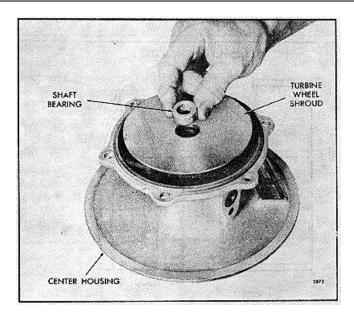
Installing Shaft Bearing in Center Housing (Turbine End)
